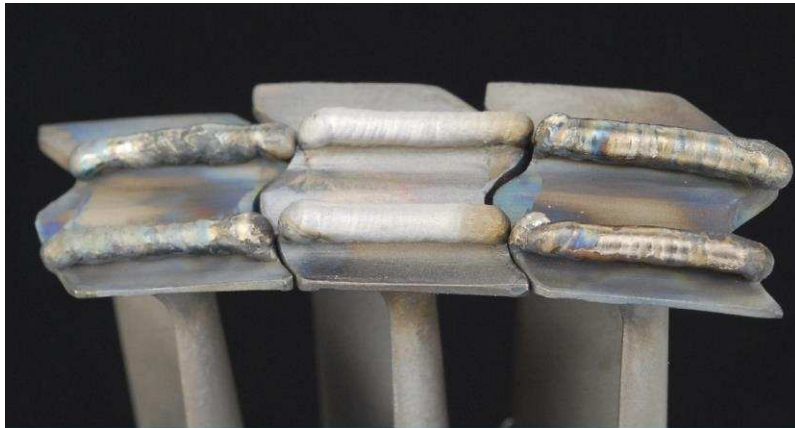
Photograph of compressor blades after manual weld deposition
